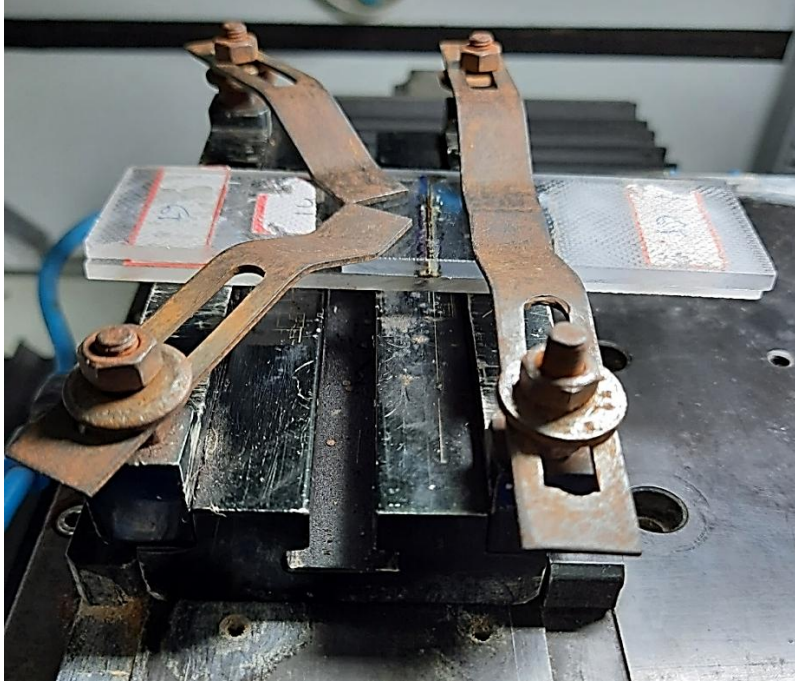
Pictorial view of welding fixture used for experimental work
